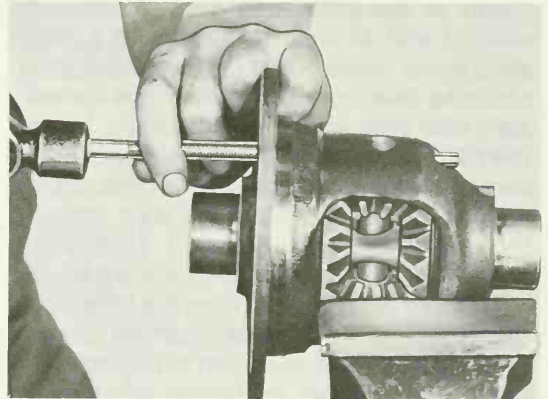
Pinion shaft lockpin or cross shaft lockpin is removed with a punch. (American Motors Corporation)
